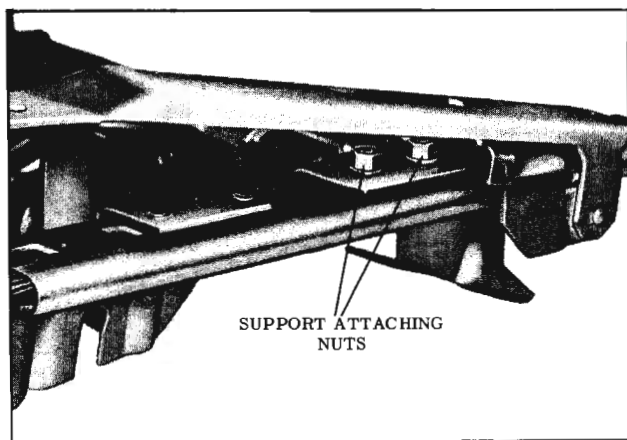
Bucket Seat Adjuster (Inboard)
